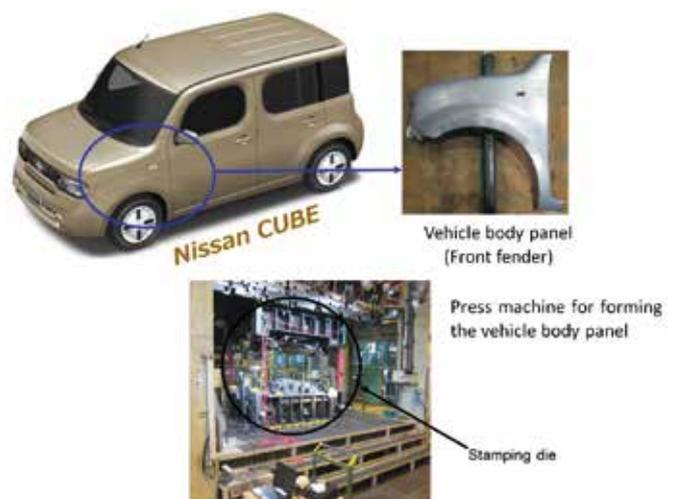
Vehicle body panel and the press machine for forming the vehicle body panel
